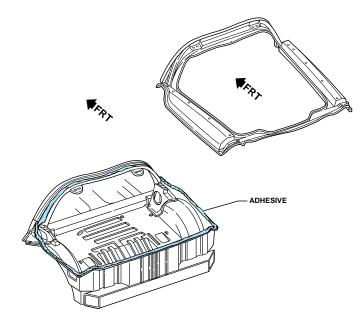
Apply a Consistent Bead of Adhesive to the Entire Perimeter to Form a Leak-Proof Seal
